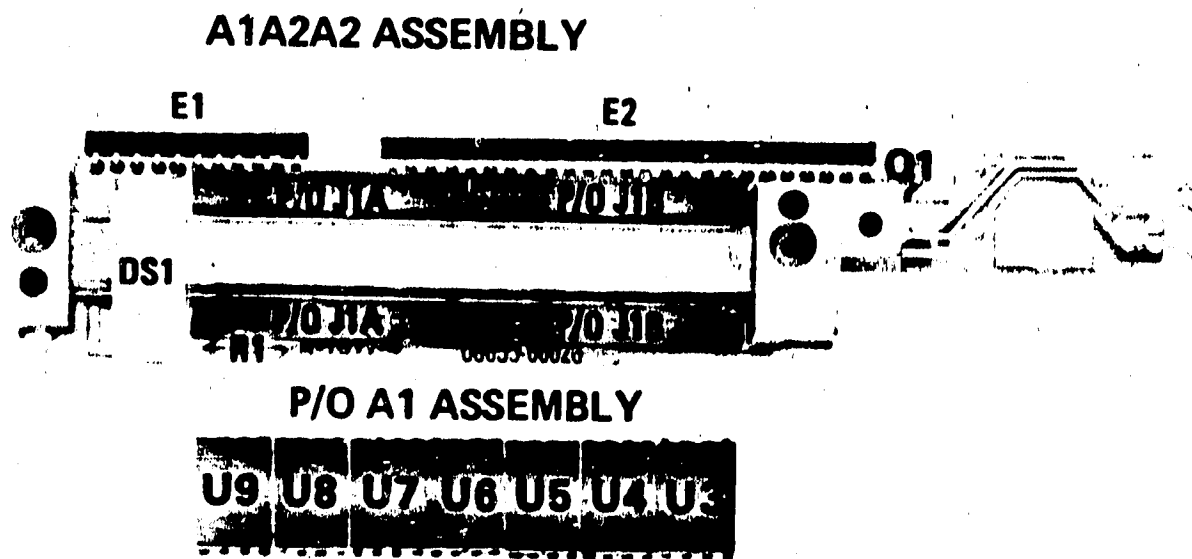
A1A2A2 Display Socket Board Assembly Component Locations (P/O Change 6)
